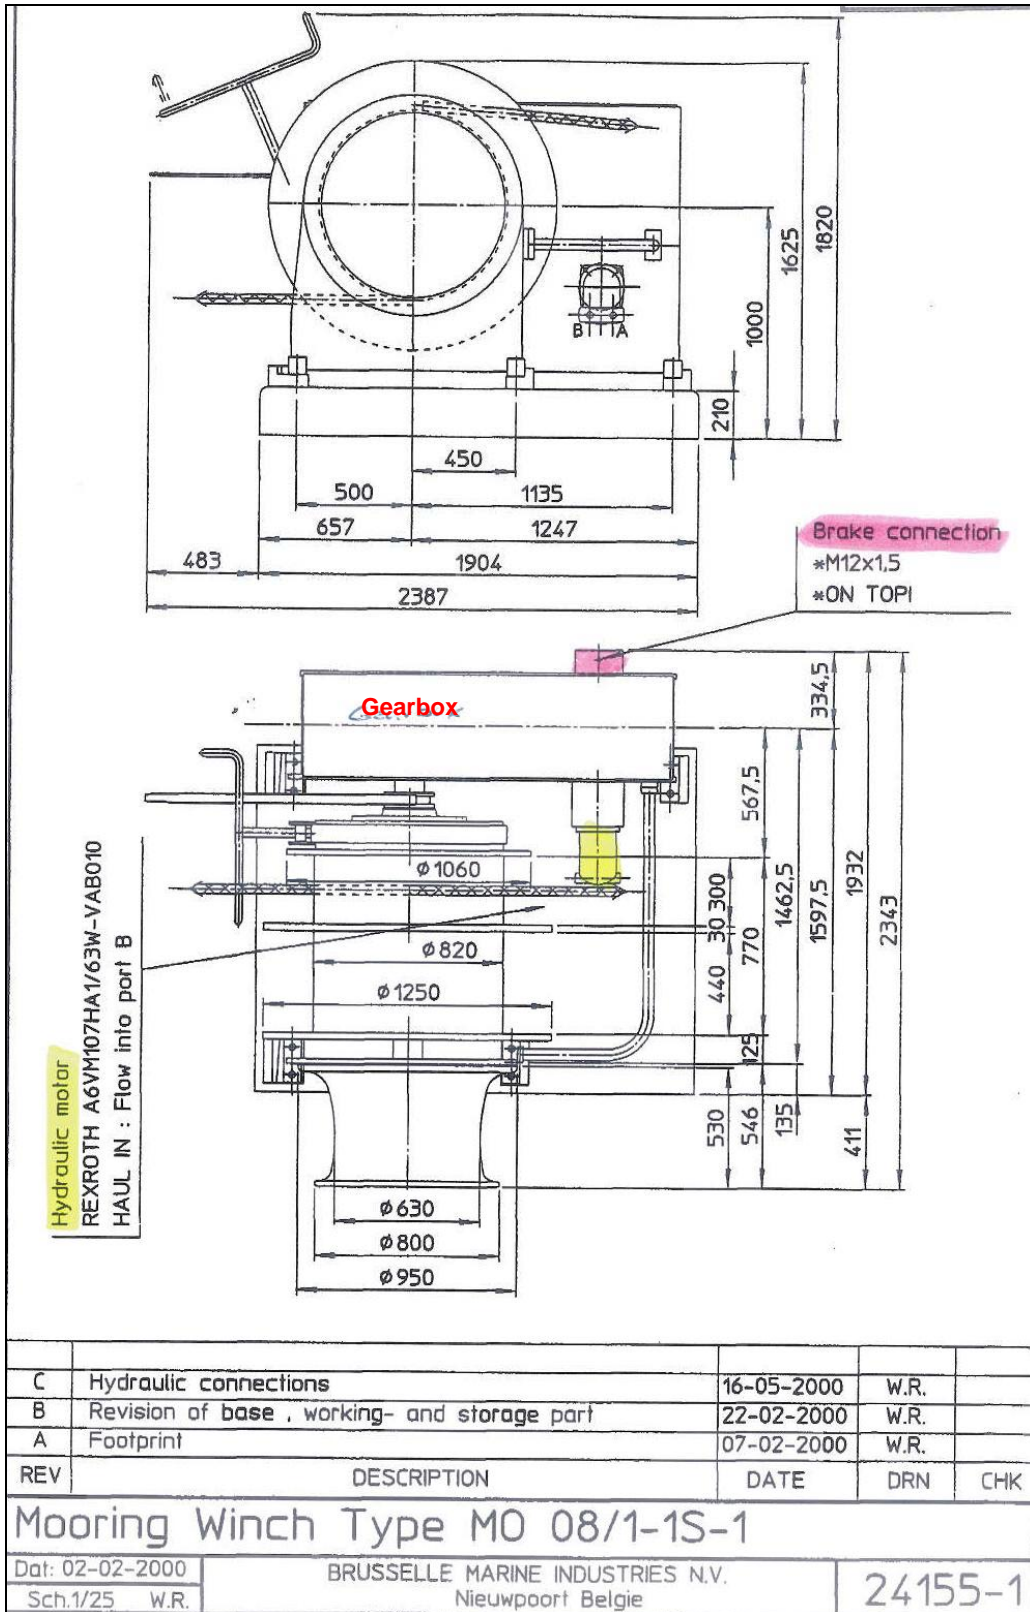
Technical drawing – hydraulic winch<sup>10</sup>
